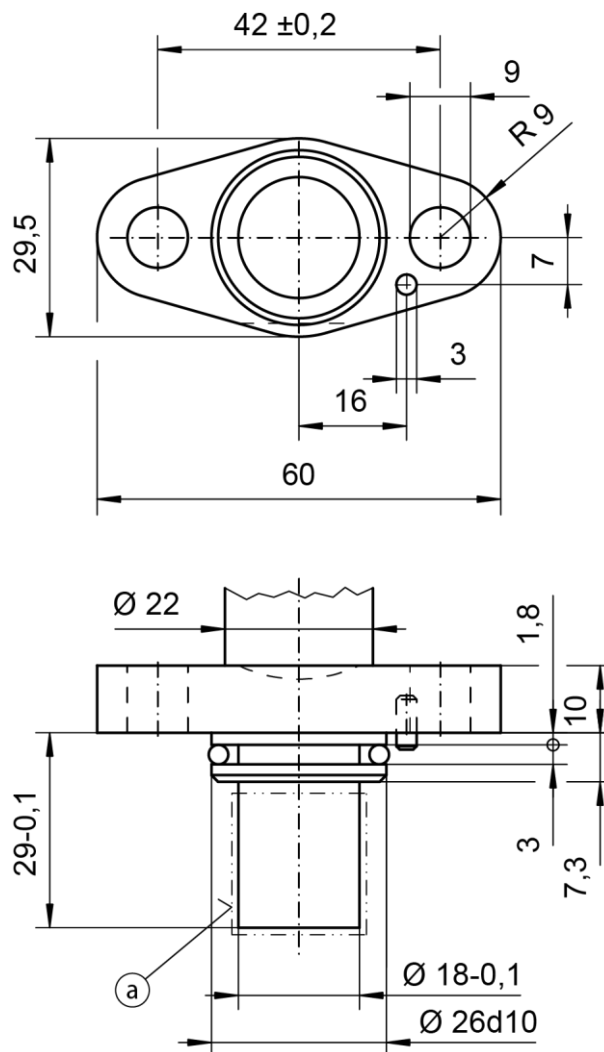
/1: Flange for pulse generator HS22 (insertion depth 29mm)
